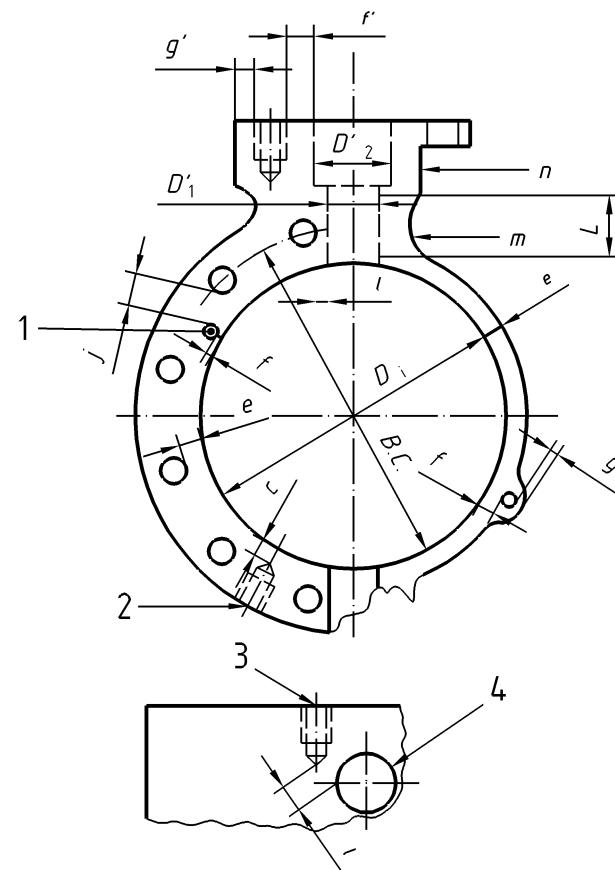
Typical casting section showing required radiographic examination of ball valve body
